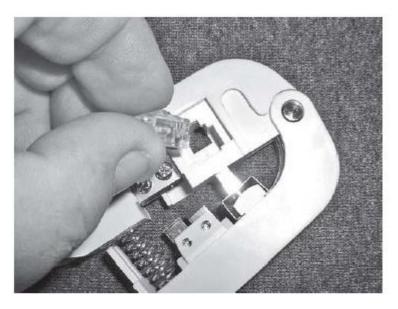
■ Placing a Modular Plug into the Tool Cavity
